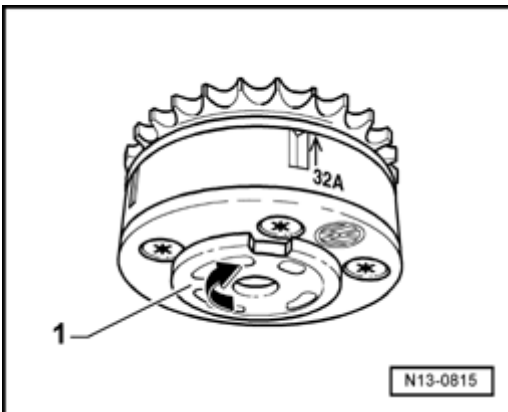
Turning Sensor Wheel Of Exhaust Camshaft Adjuster To Right
